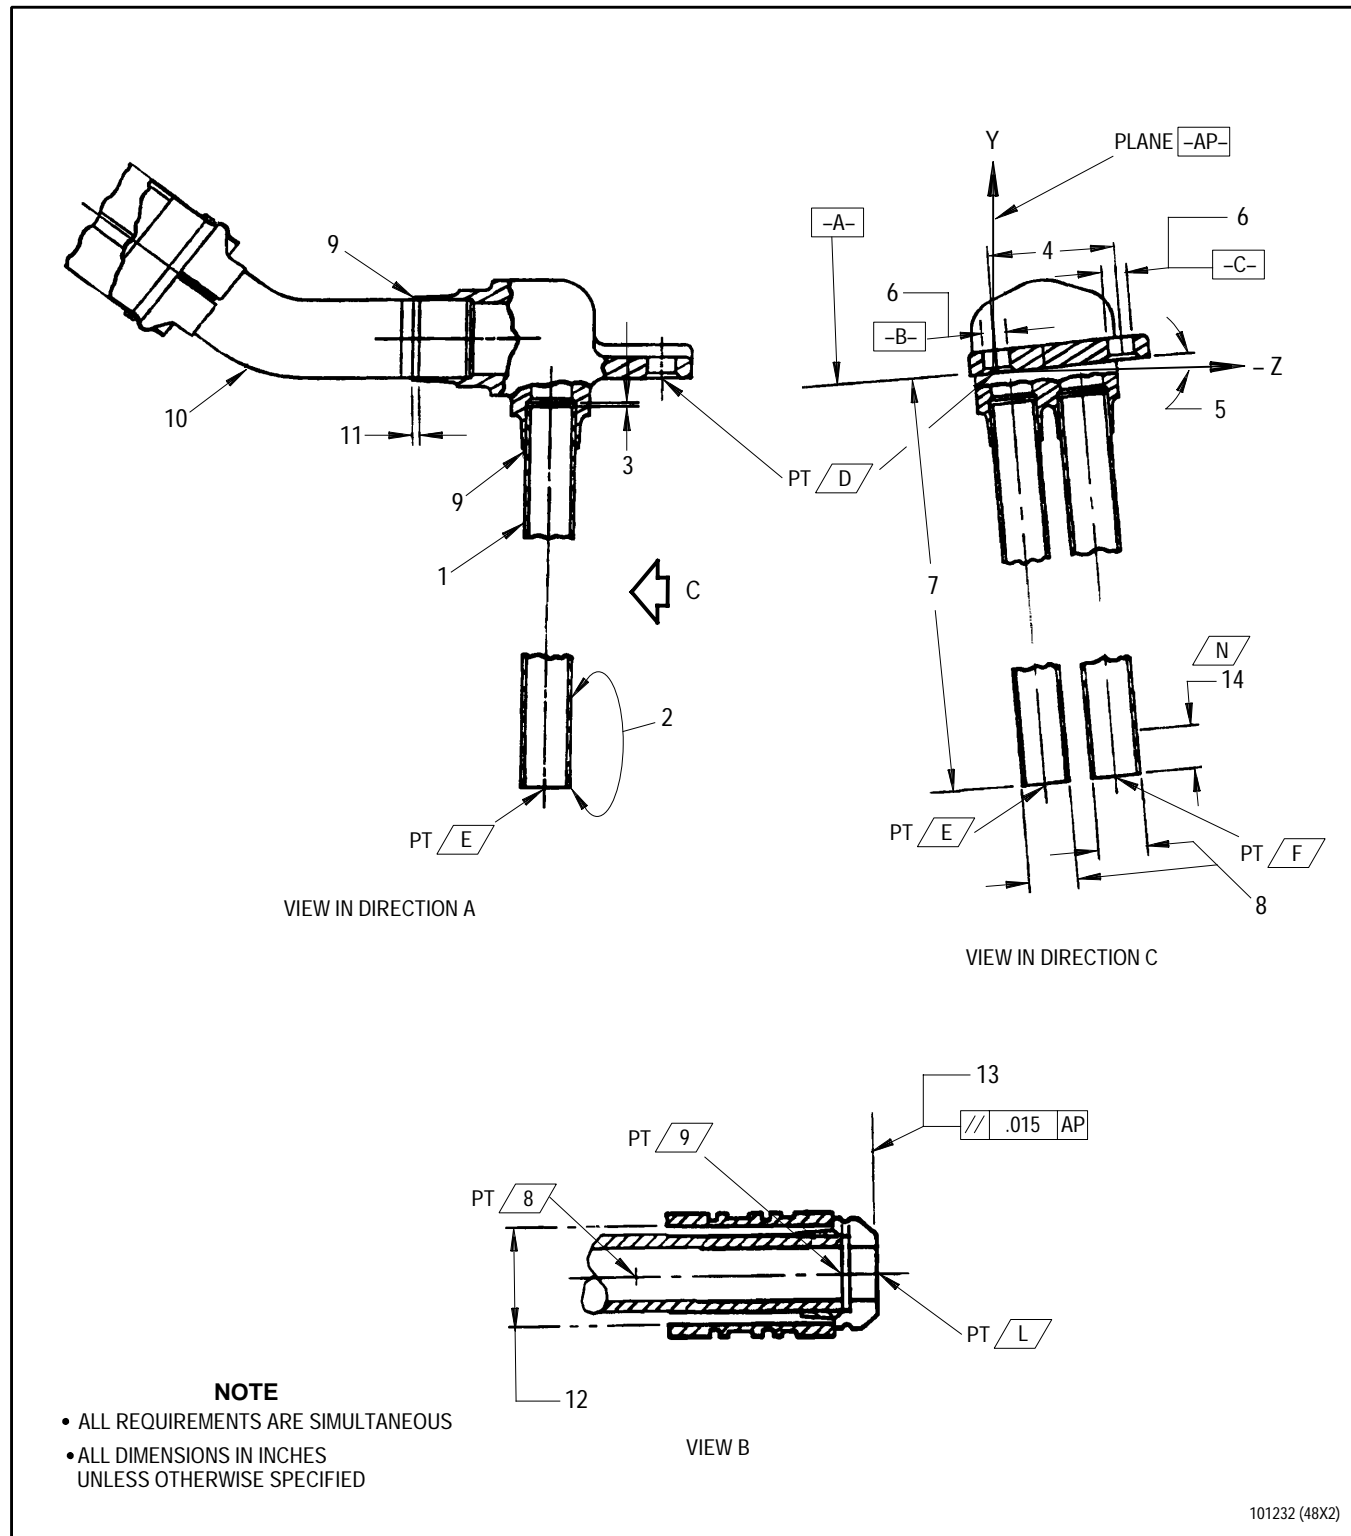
No. 4 Bearing Left Internal Scavenge Tube Assembly - Assembly and Brazing Positional Requirements (Sheet 2 of 2)
